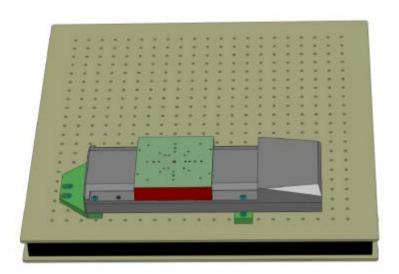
M-5x1 with adapter (M-590.00 three-point support) on a honeycomb plate
